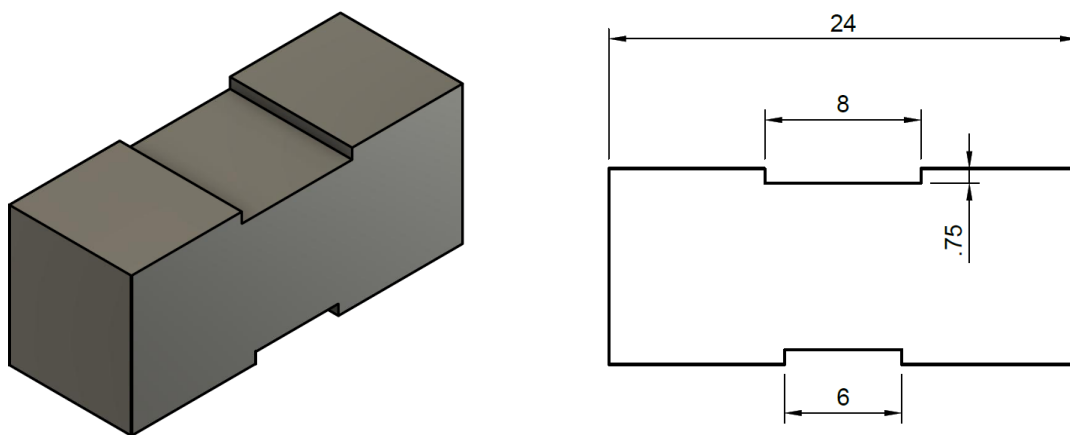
Precrack block dimensions for cracking of fracture toughness specimen (mm).
